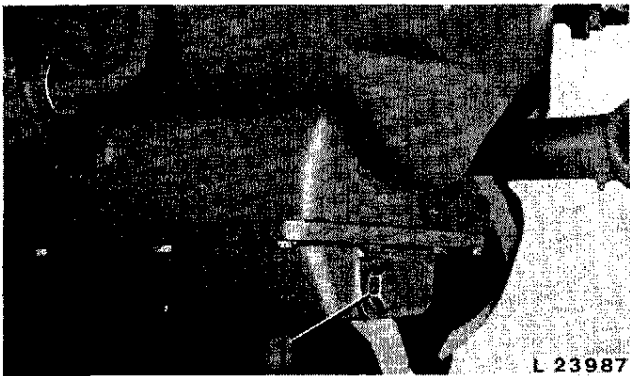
Clutch Housing Drain Plug (on Tractors with MFWD)
